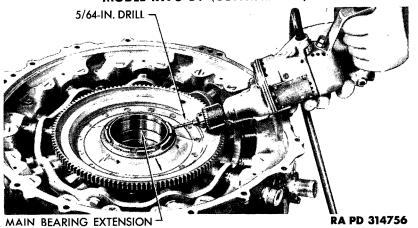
Drilling Main Bearing Extension for Cotter Pins
